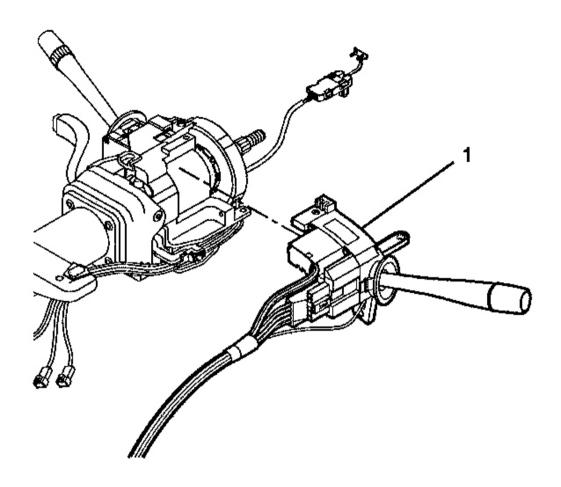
Multifunction Turn Signal Switch Assembly Courtesy of GENERAL MOTORS CORP.
